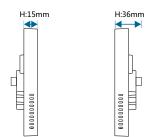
Dimensional Drawing - Left View Figure 6. Dimensional Drawing - Right View
